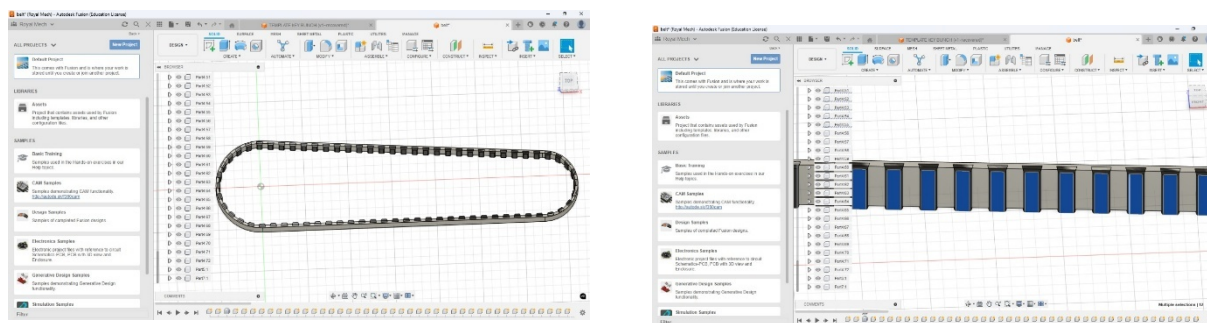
CAD model of TPU 95A belt with trapezoidal tooth profile.
